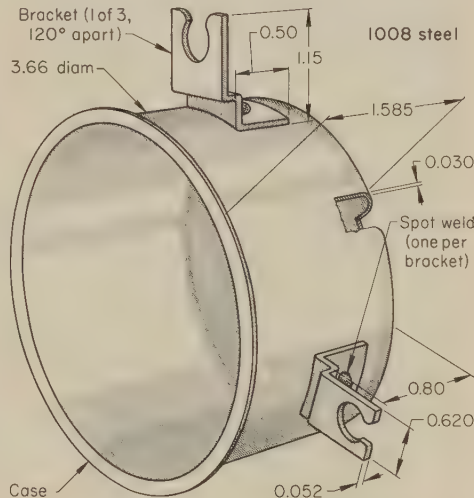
Clock case for which method of attaching three brackets was changed from riveting to spot welding (Example 382)
